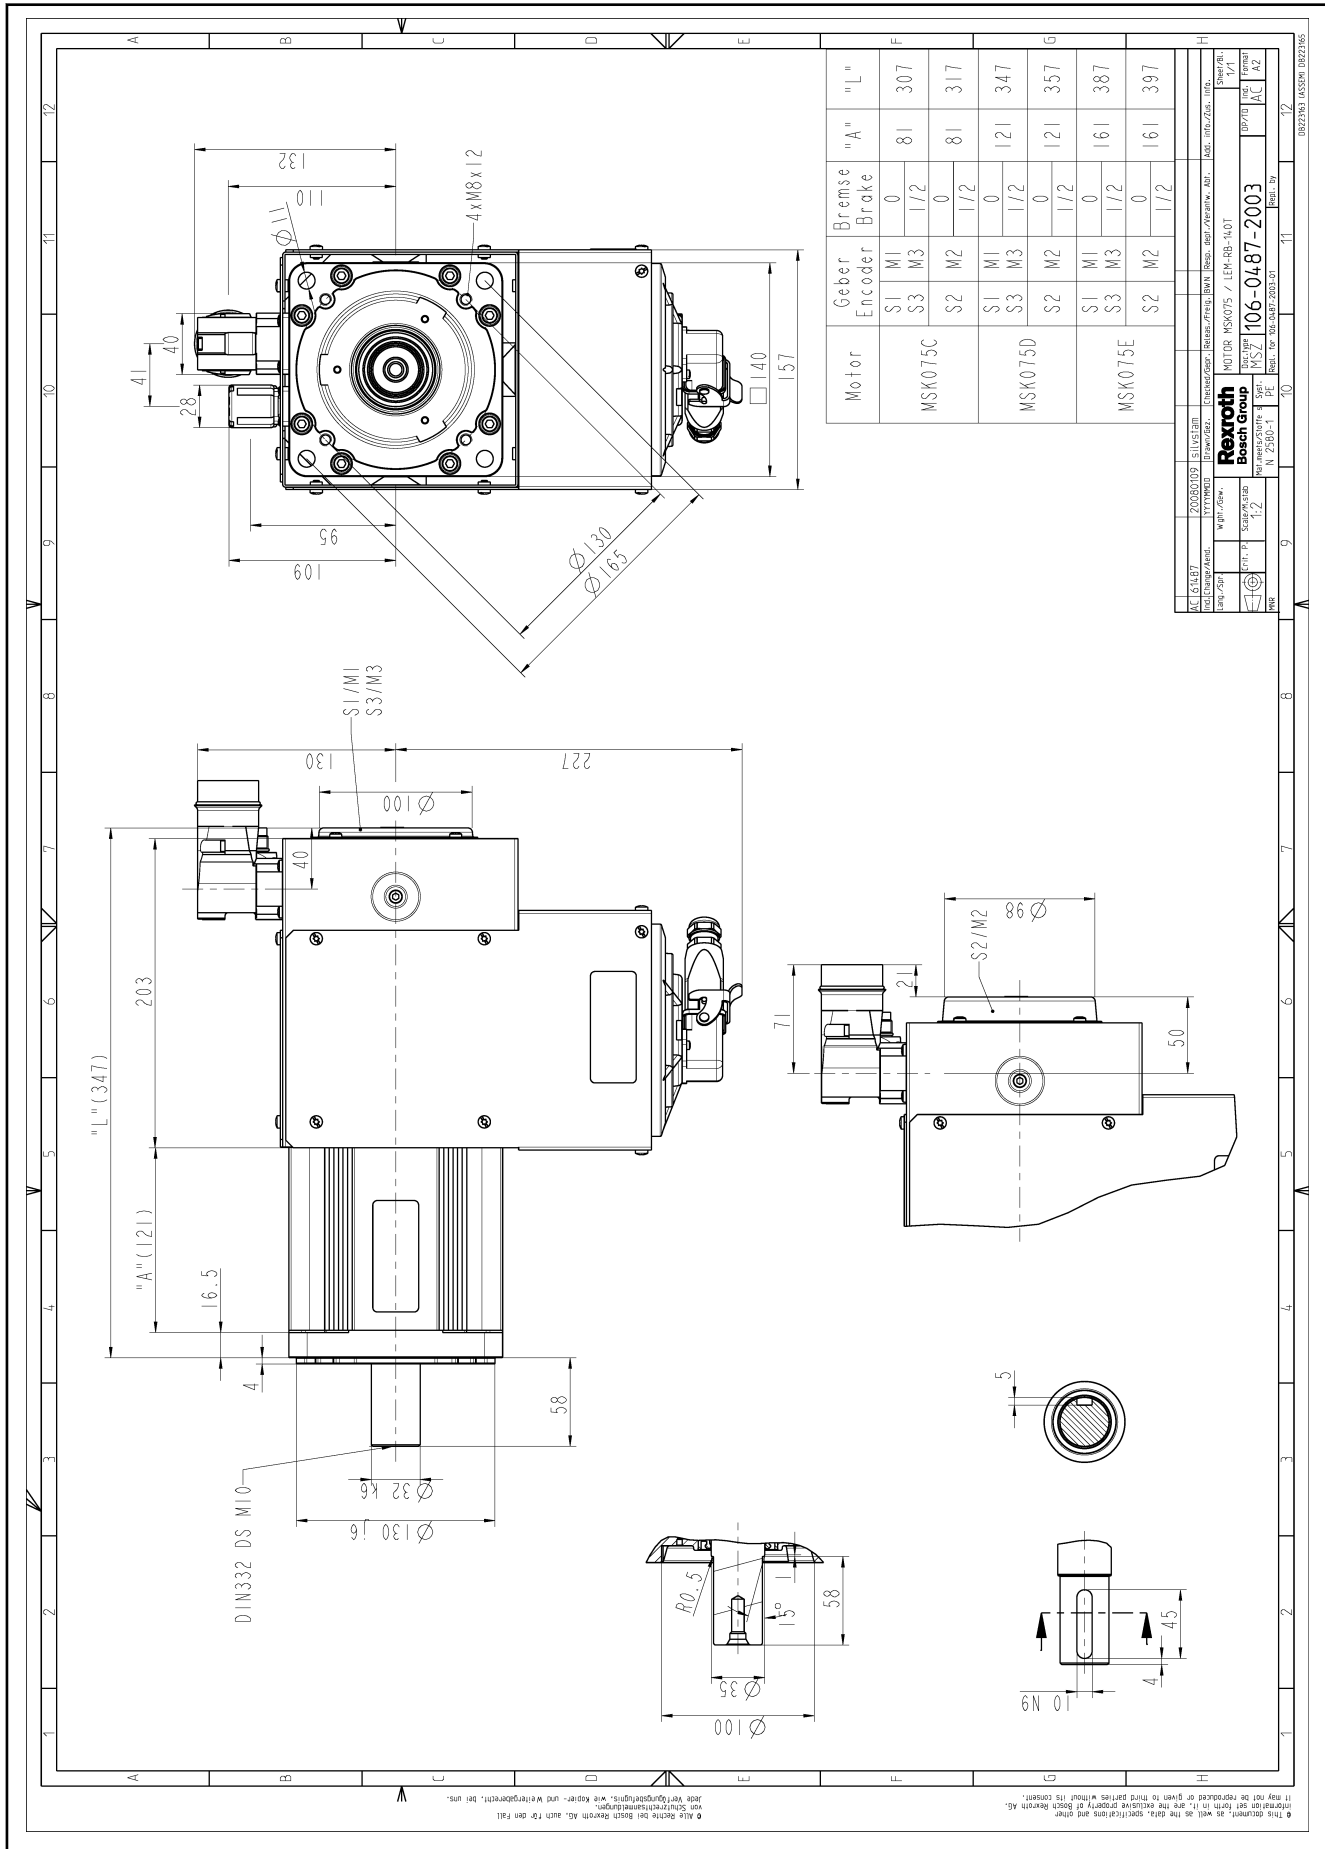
Dimension sheet MSK075 with radial fan unit
